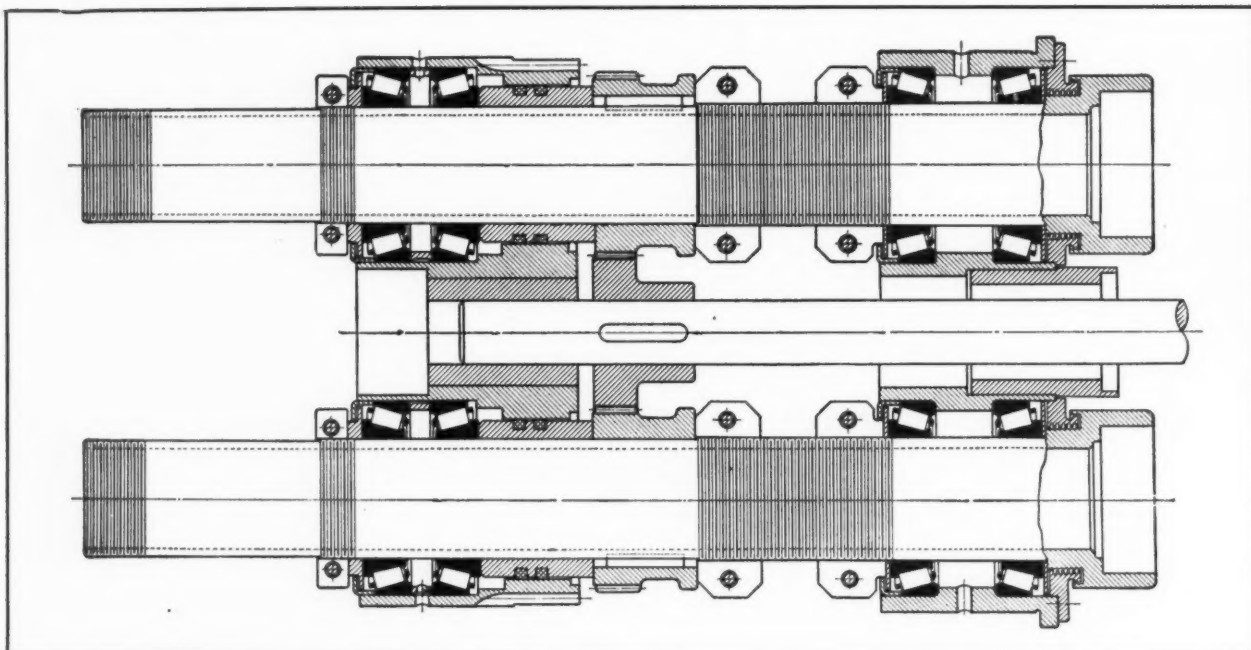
Typical Mounting Used in a Multiple-spindle Automatic Screw Machine
